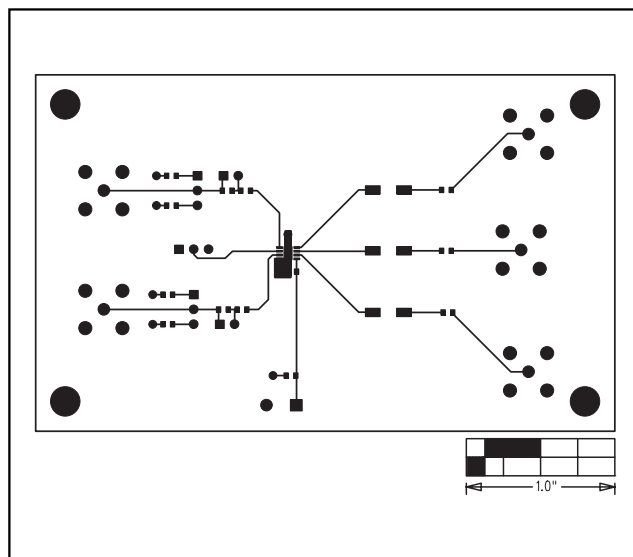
MAX7443 EV Kit PC Board Layout—Component Side
